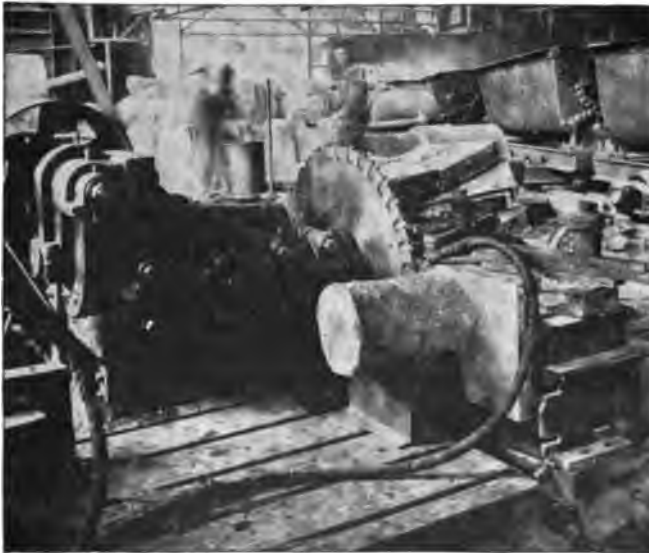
A cold saw (Taylor-Newbold) with inserted teeth held in place by soft metal.
